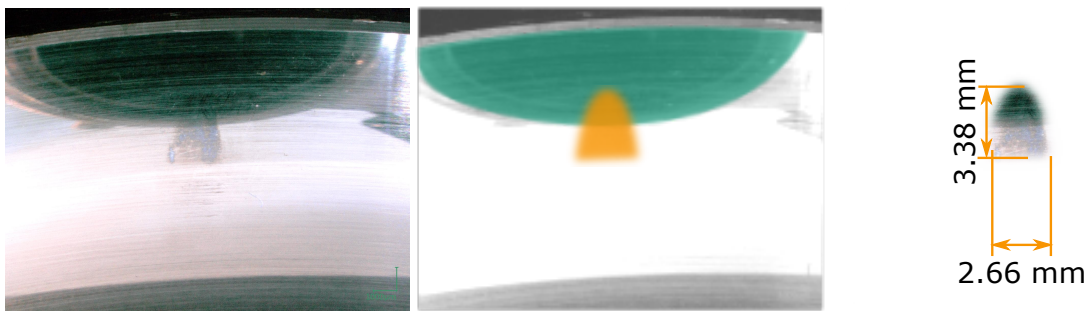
Exemplary raceway condition inner ring, Test ID 7, Bearing ID 0023
